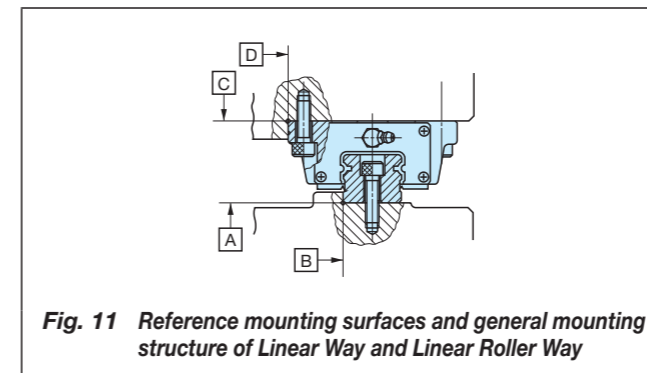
Reference mounting surfaces and general mounting structure of Linear Way and Linear Roller Way
